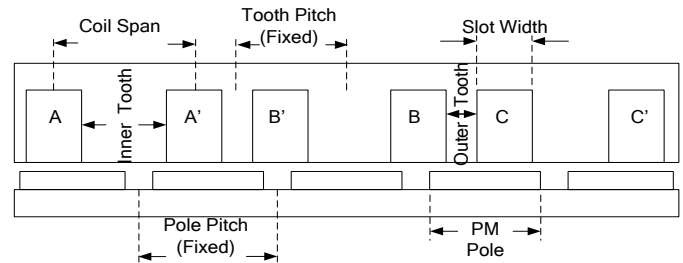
Representation section of single layer pm machine with unequal teeth.
